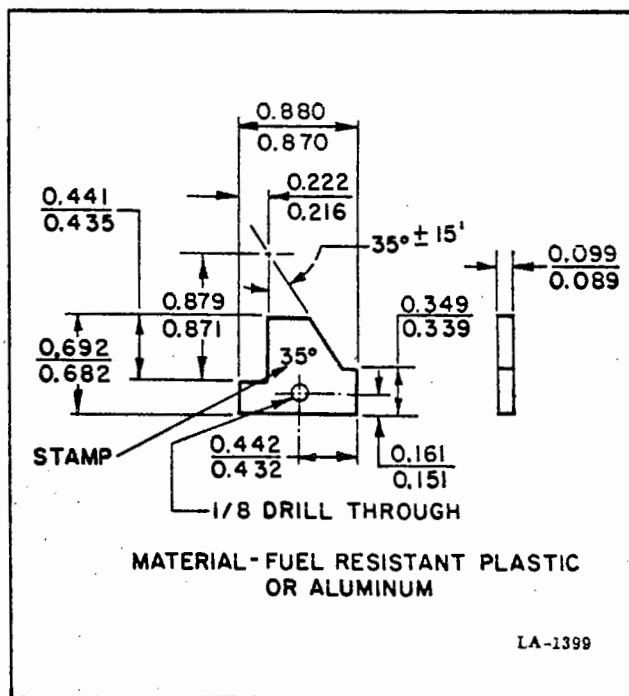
Dimensions for Manufacturing the T25939 Gage
